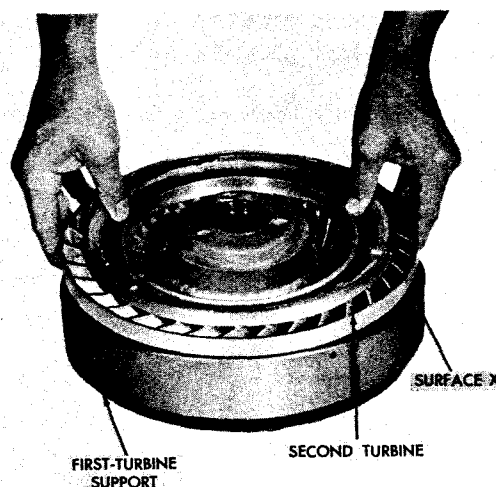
Removing (or installing) second turbine from first-turbine support
